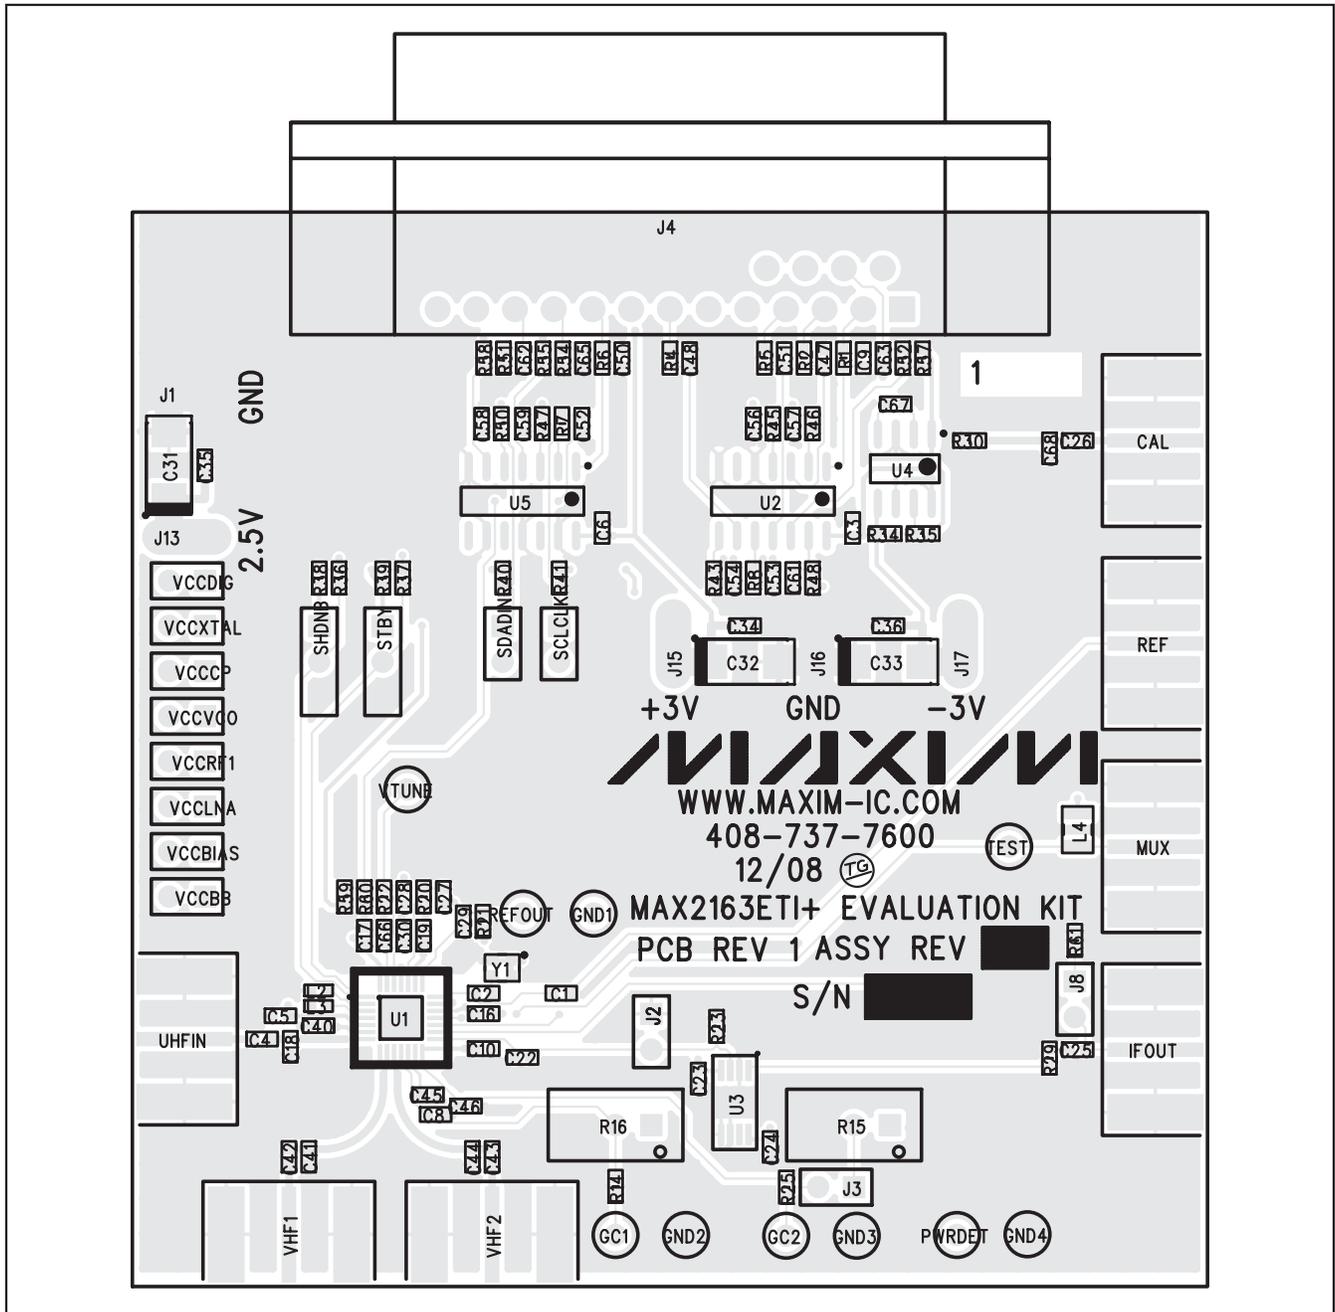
MAX2163 TQFN EV Kit PCB Layout—Component Placement Guide
